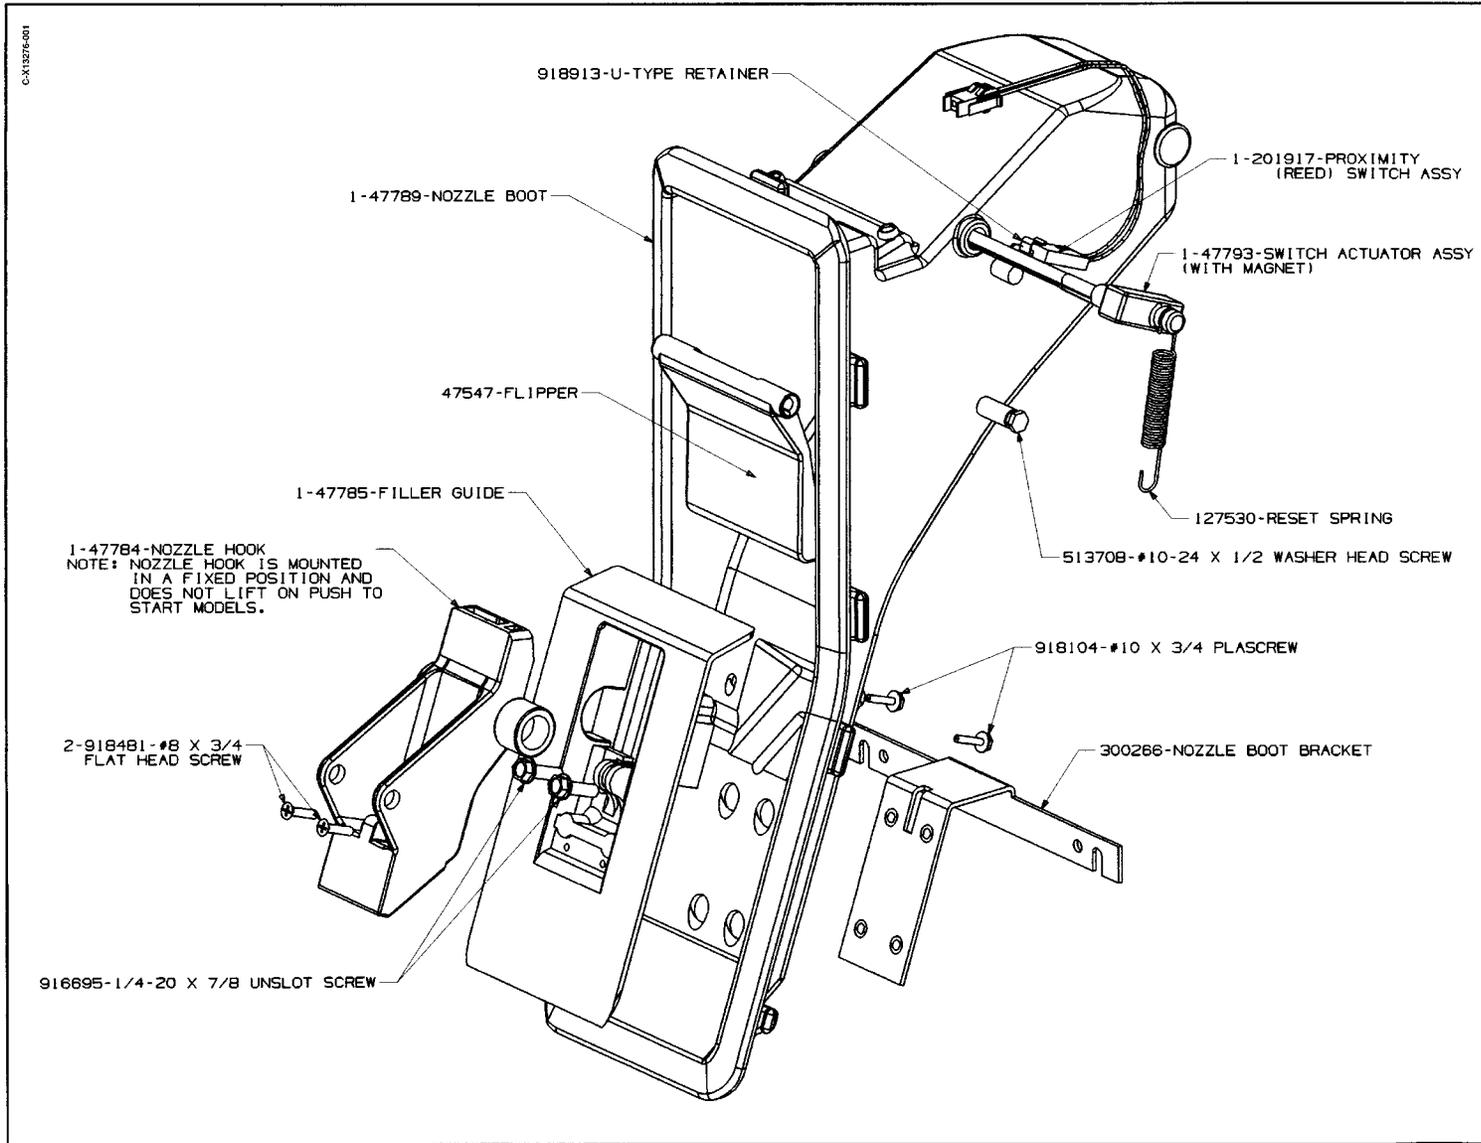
NOZZLE BOOT ASSEMBLY (PUSH-TO-START).
